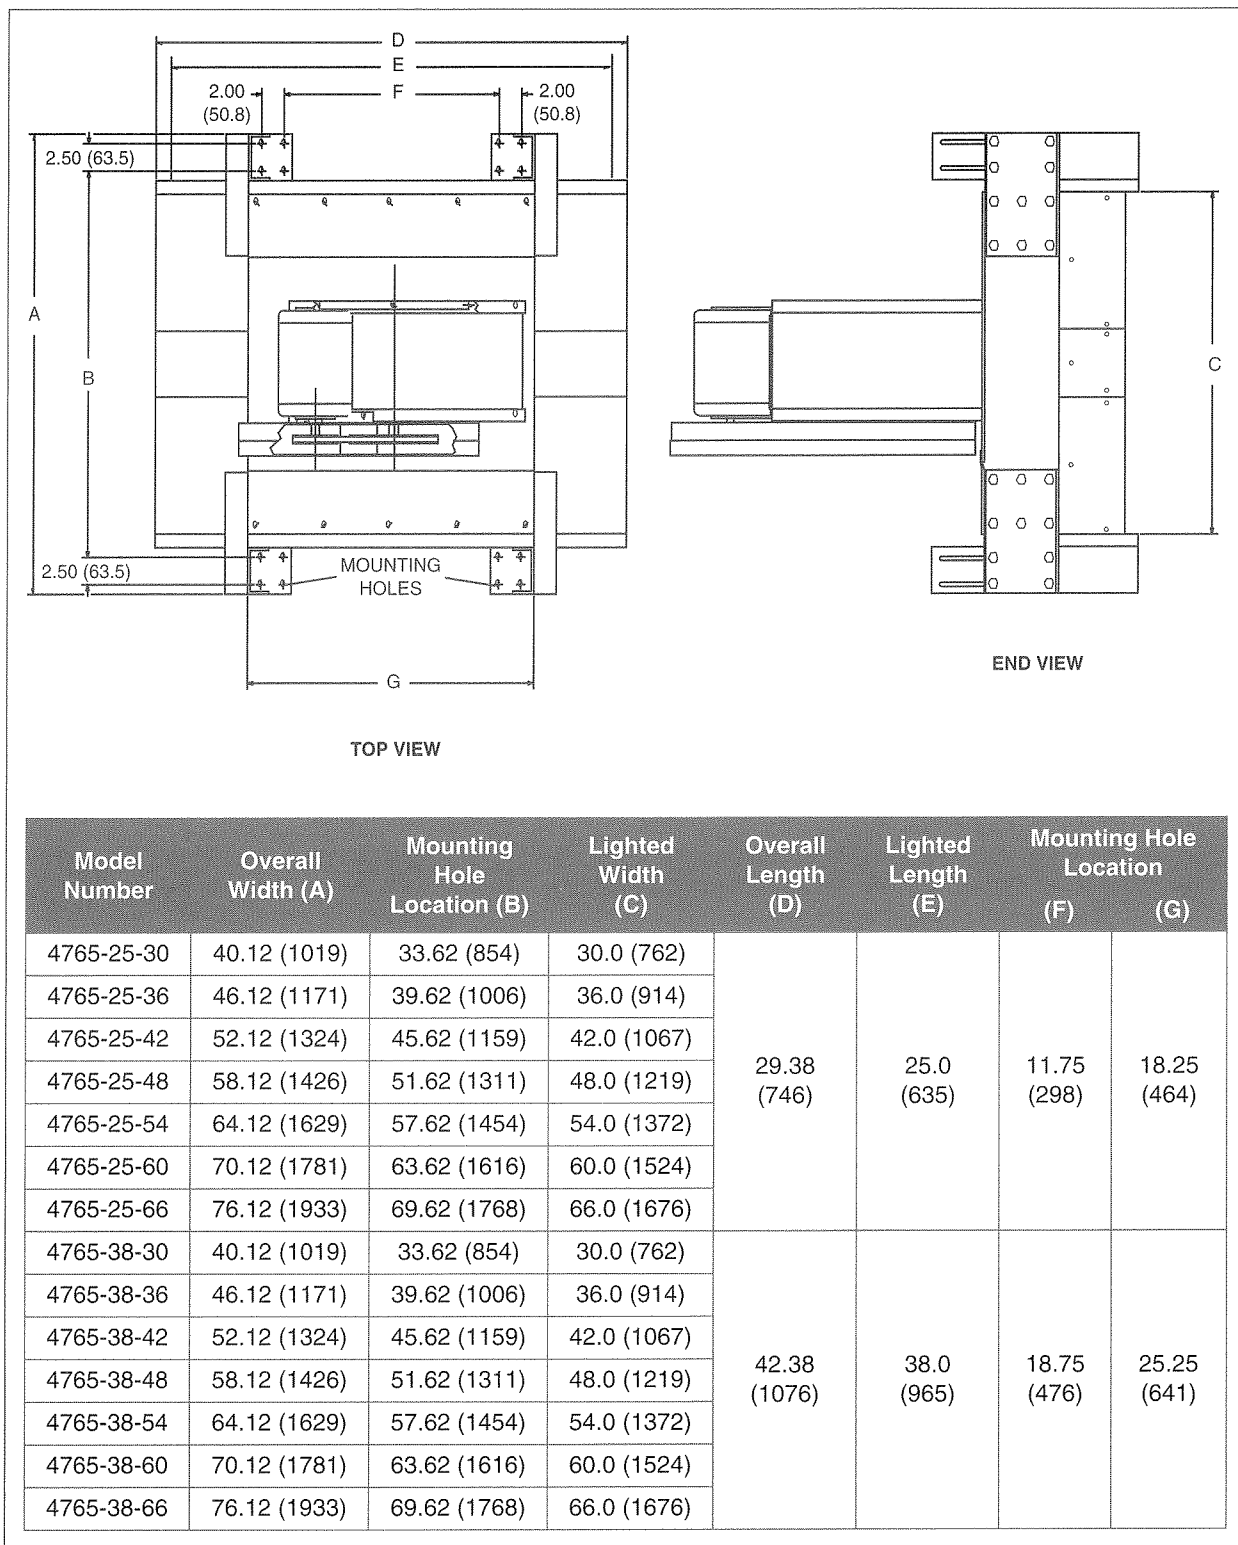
Model 4765 Dimensions [All dimensions in inches (mm)]
